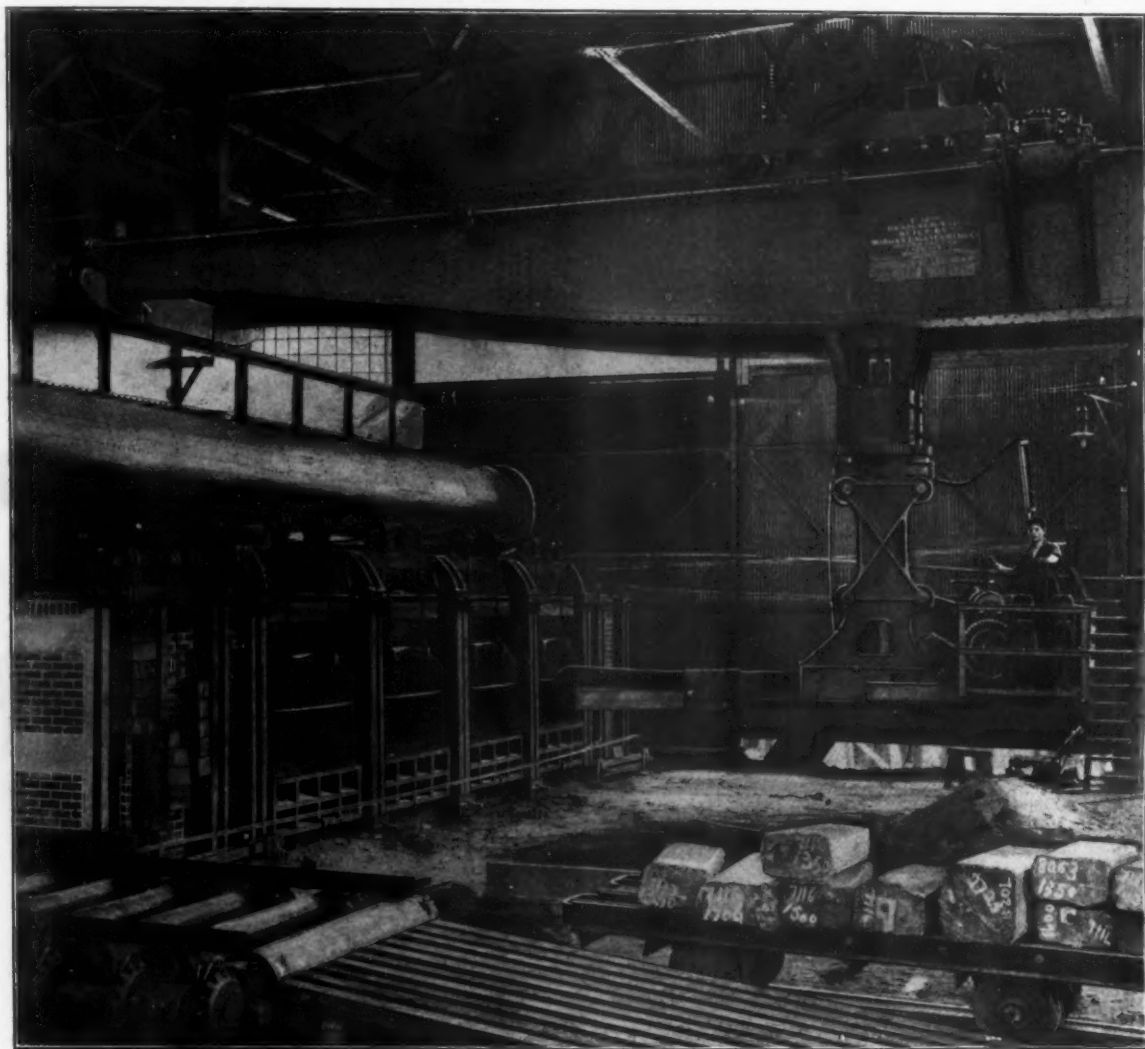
The Morgan Electric Ingot Charging Machine.
